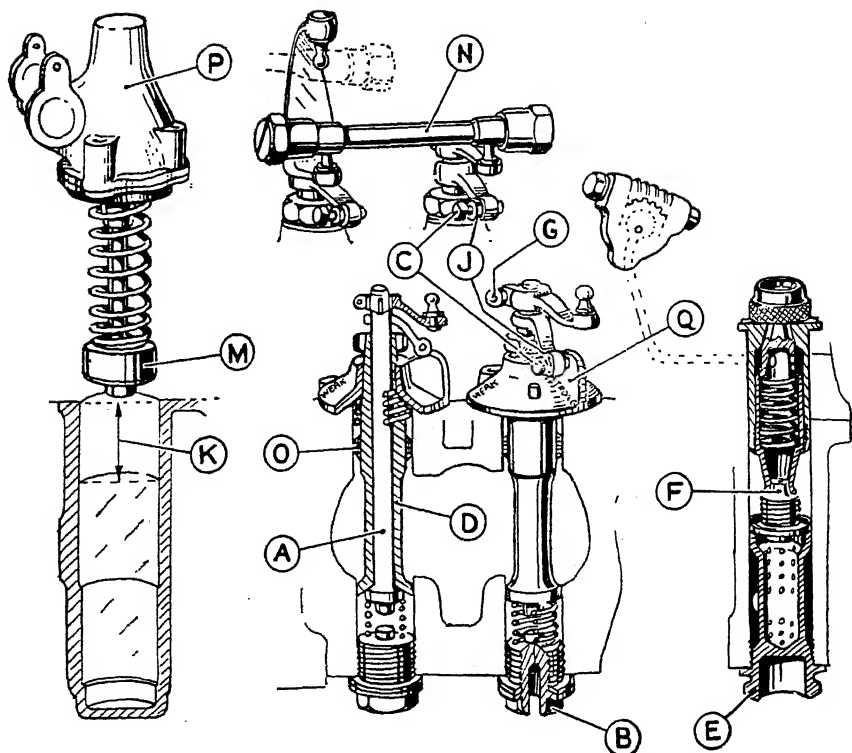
ACCELERATOR PUMP, FUEL LEVEL, MIXTURE CONTROLS, AND SLOW-RUNNING ADJUSTMENTS
